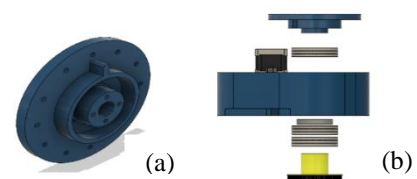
(a) Joint 1 connector plate. (b) Exploded view of joint 1 bearing assembly.
